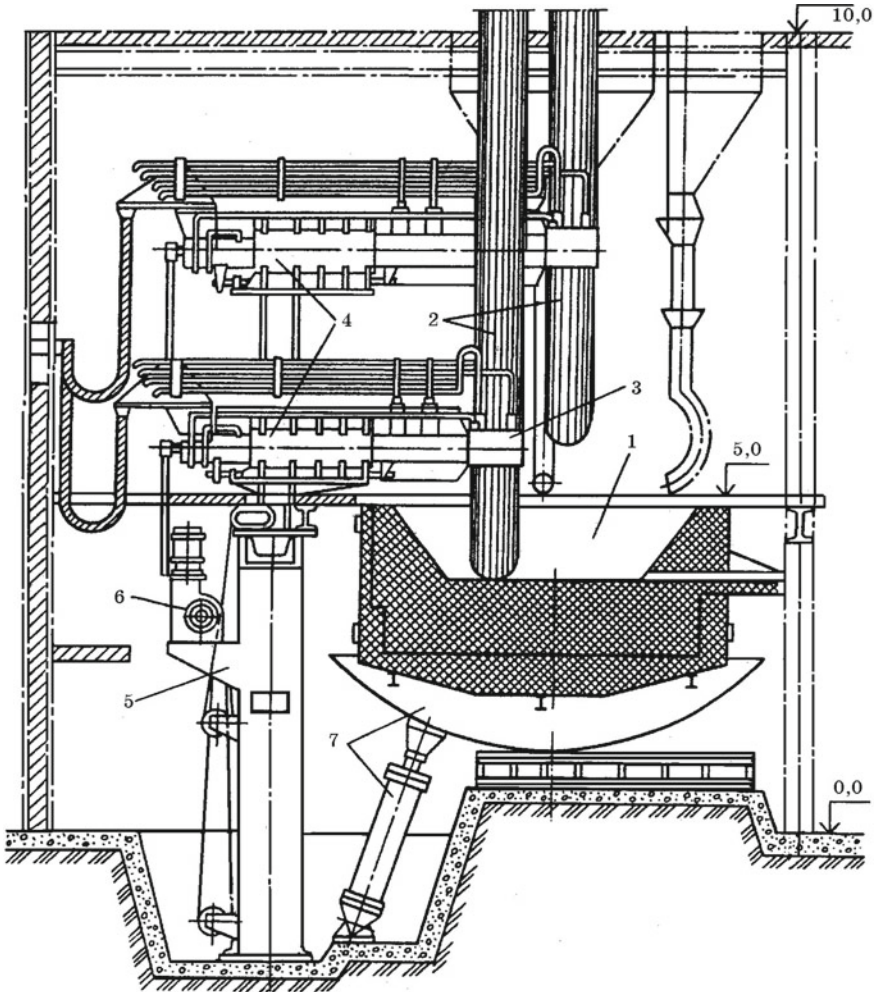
General view of a ferroalloy refining furnace: 1—bath; 2—electrodes; 3—contact node; 4—electrode holder sleeve; 5—telescopic stand; 6—lifting mechanism; and 7—cradle and tilt mechanism
